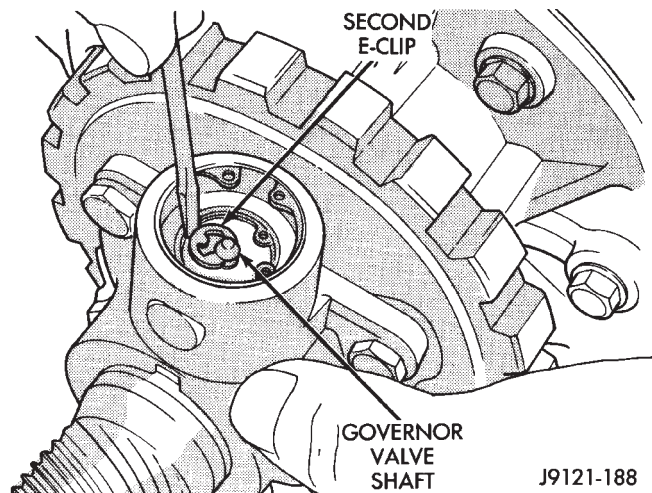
Securing Governor Valve Shaft With New E-Clip
